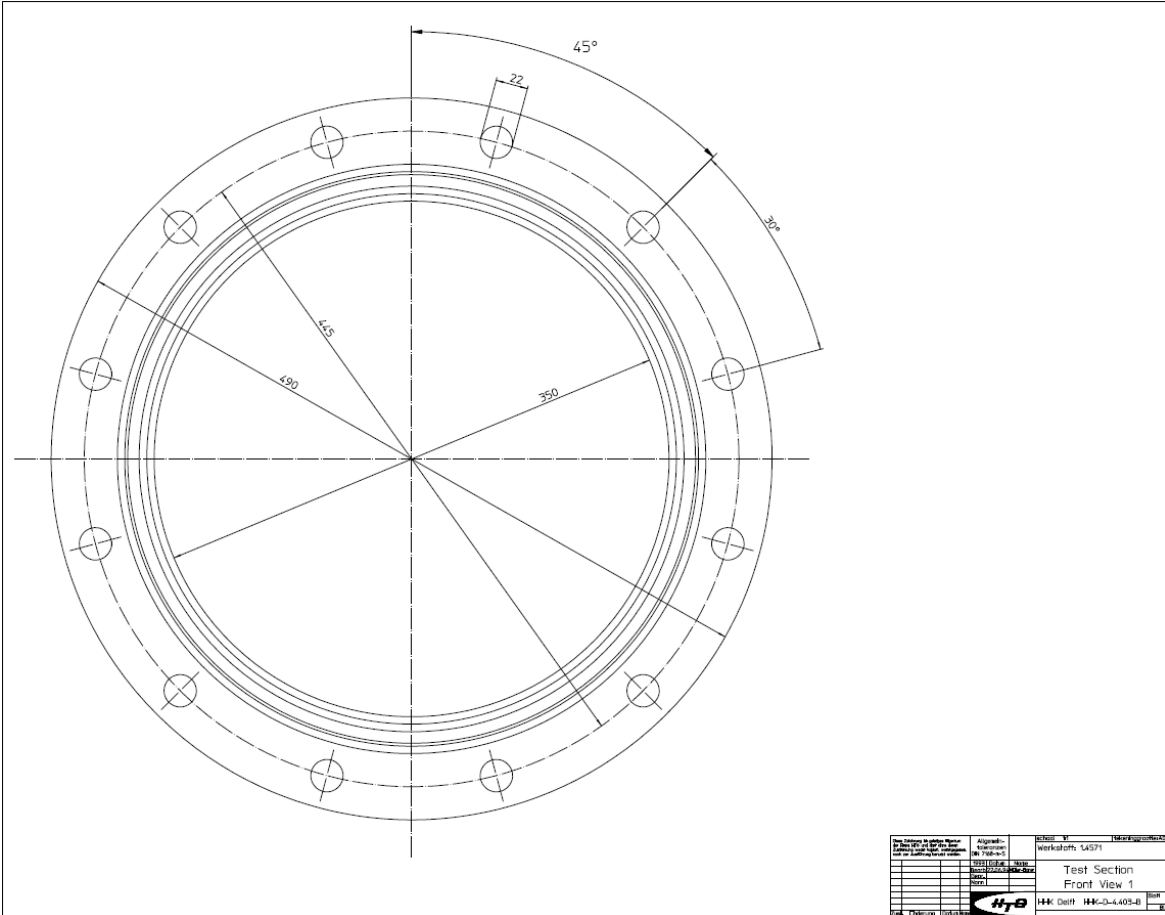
Detailed drawing of the HTFD vacuum chamber ring connection
